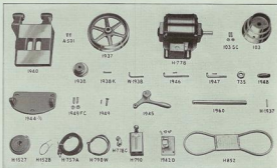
Parts of Adjustable Horizontal Motor Drive for Lathes.
